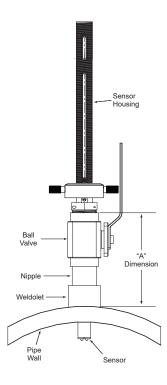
Hot-Tap installation with "A" dimension using a ball valve, short nipple and weldolet (threadolet)
